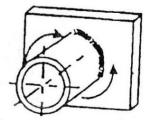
Unified pipe welding positions (butt welds)
